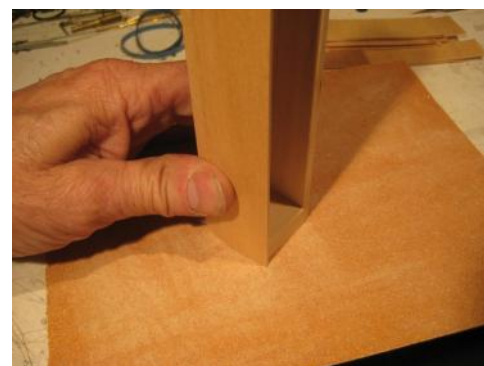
Squaring up the top and bottom of the ends to the floor and roof.
